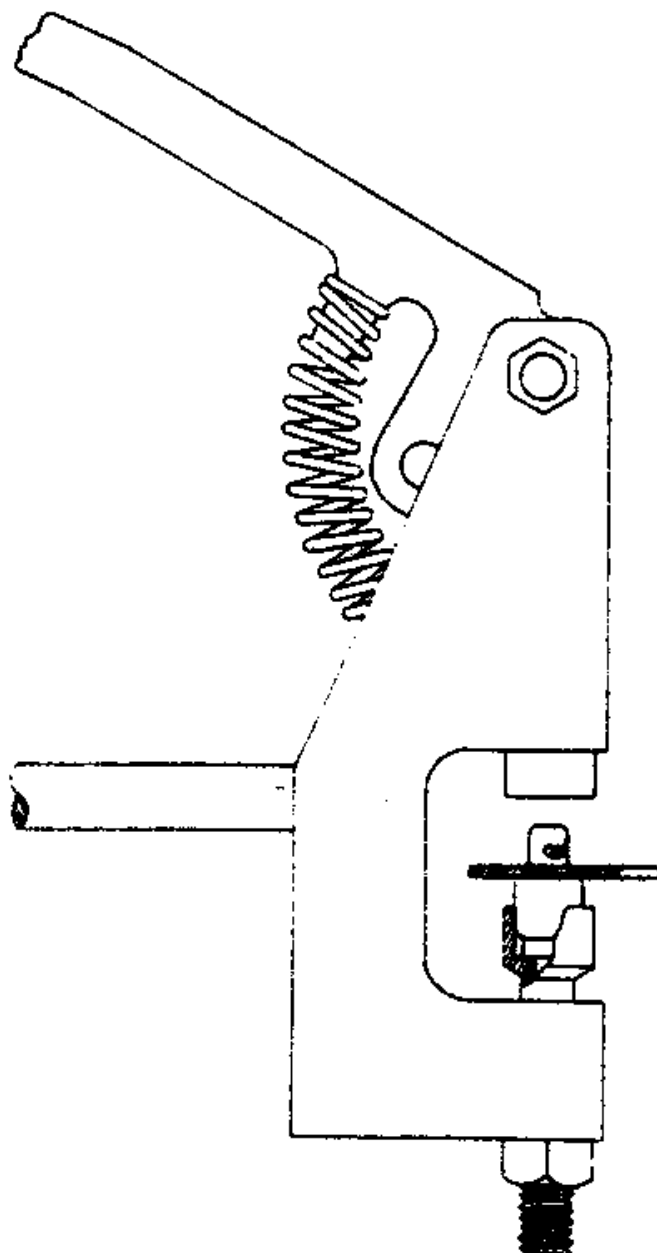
Installation of Pre-Assembled Stud Assemblies using a Hand Squeeze Installation Tool
